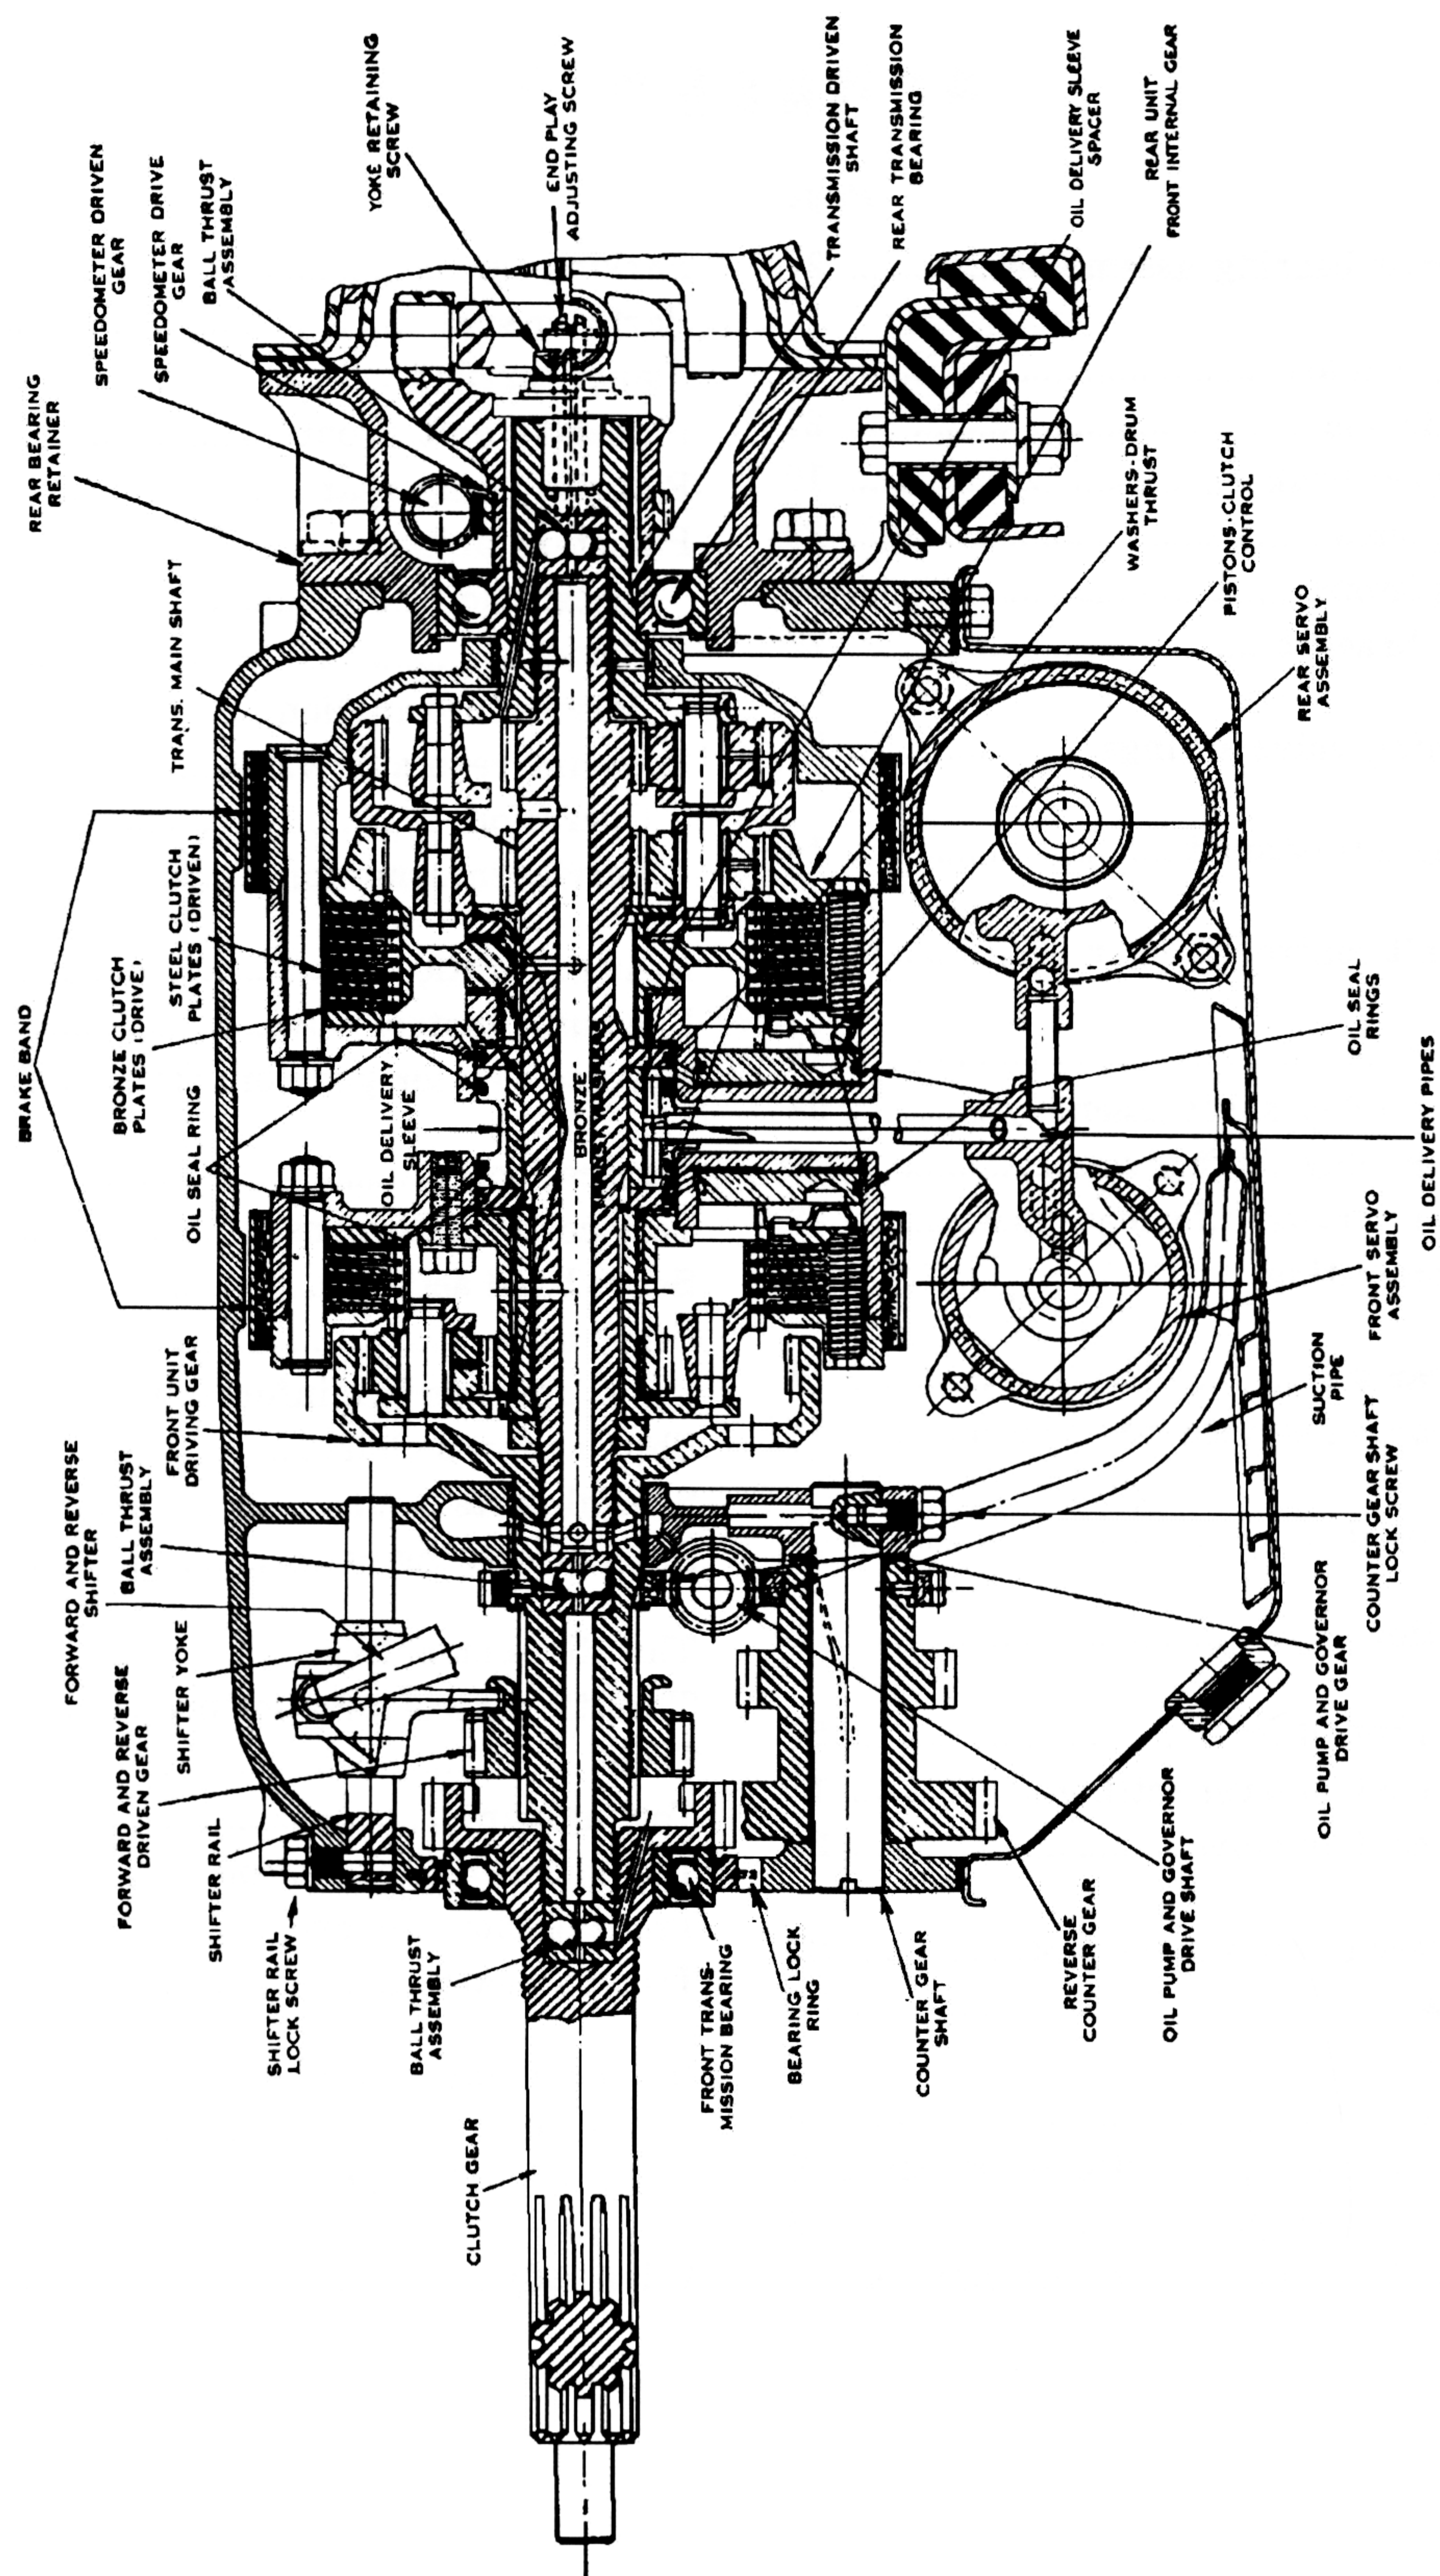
Self-Shifting Transmission Assembly Information Drawing
